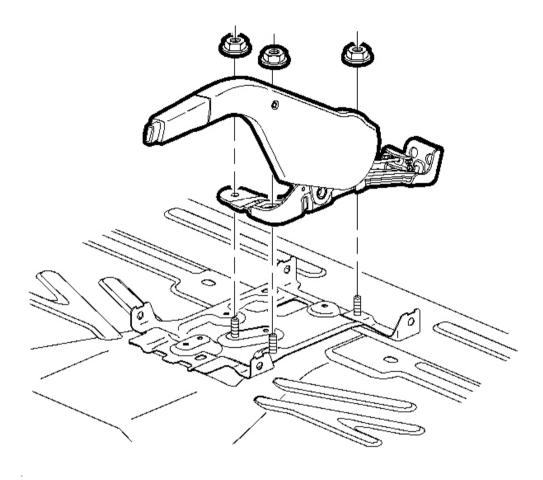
Removing/Installing Park Brake Level Assembly Courtesy of GENERAL MOTORS CORP.
